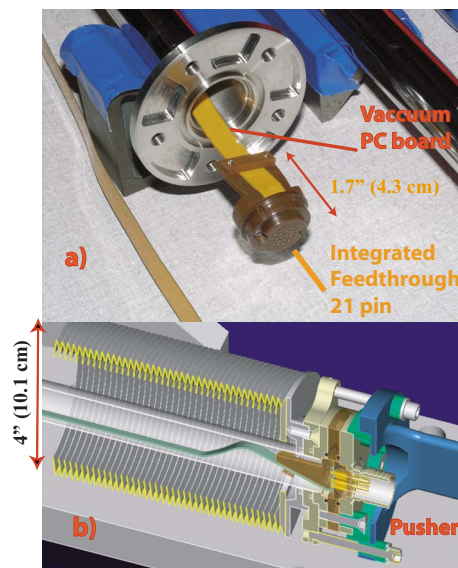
(Color online) (a) Rear shaft assembly highlighting the flexible board connector and ease of assembly and (b) CAD drawing showing the integrated system with the board pushed inside the shaft. The flexibility of the board is key to the ease of assembly and the compactness of the design.
